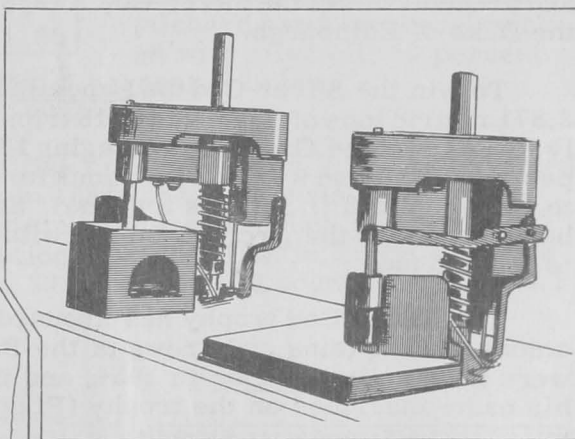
UNITS FOR CUTTING FISH: AT THE RIGHT THE MACHINE FOR CUTTING THE ANAL PORTION; AT THE LEFT, THE MACHINE FOR CUTTING THE HEAD.
